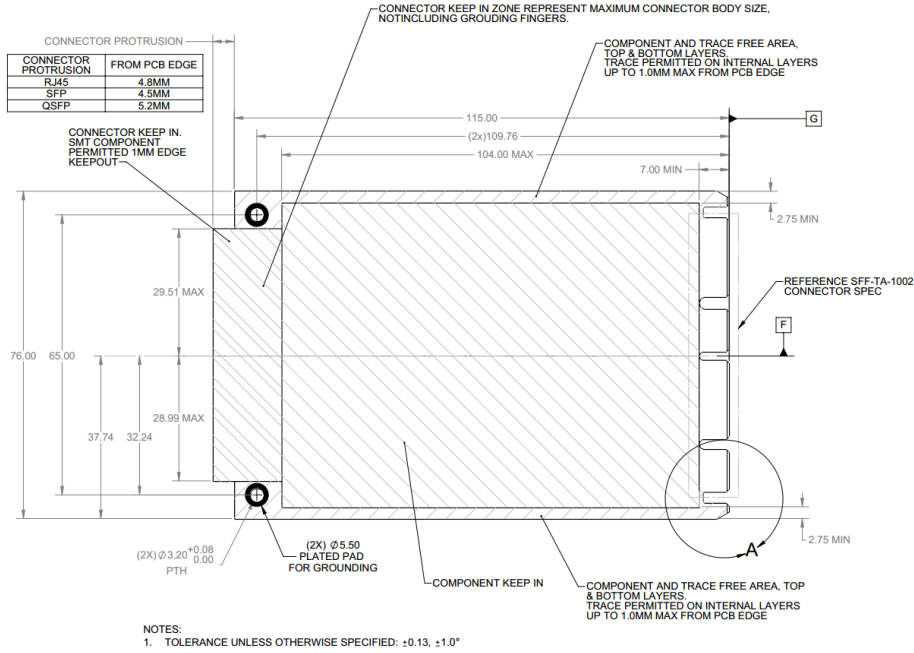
Small Form Factor Keep Out Zone – Top View – Detail A
